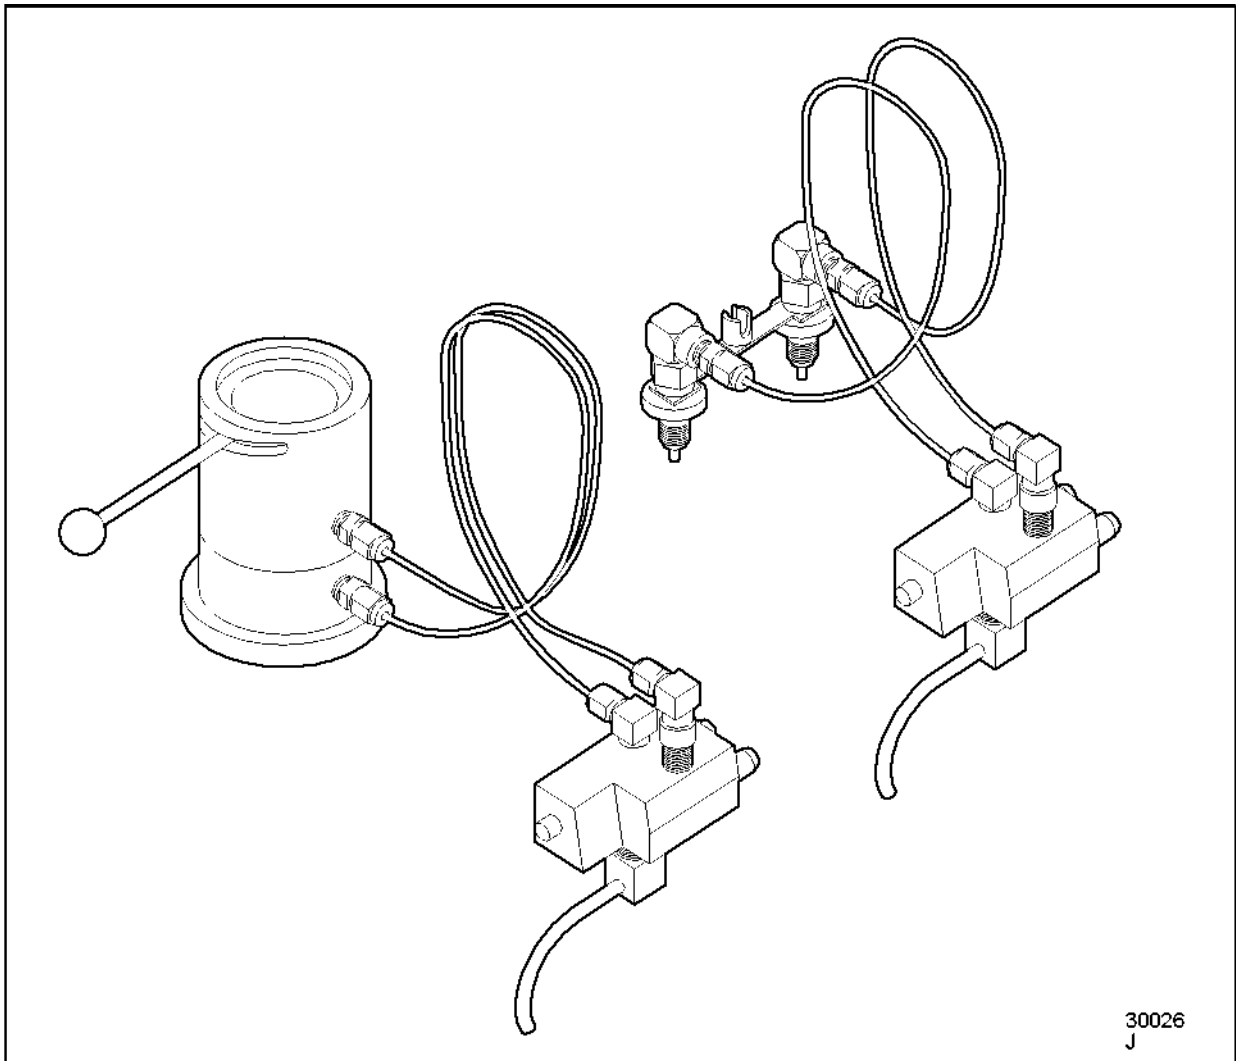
Injector Pop Fixture ADP-Electronic,J 34760-147A
